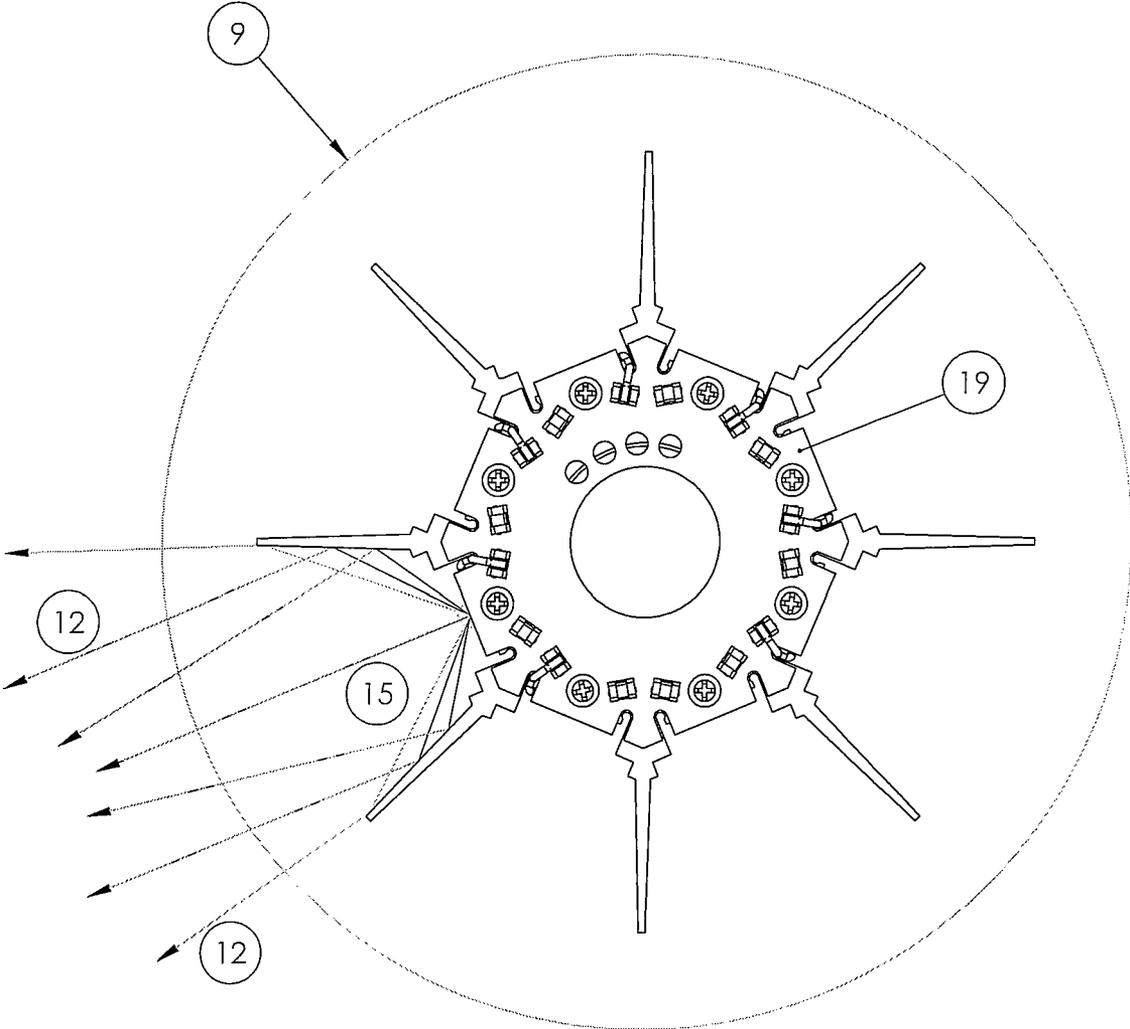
Sectional View Illustrating Light Ray Traces Between Fins
